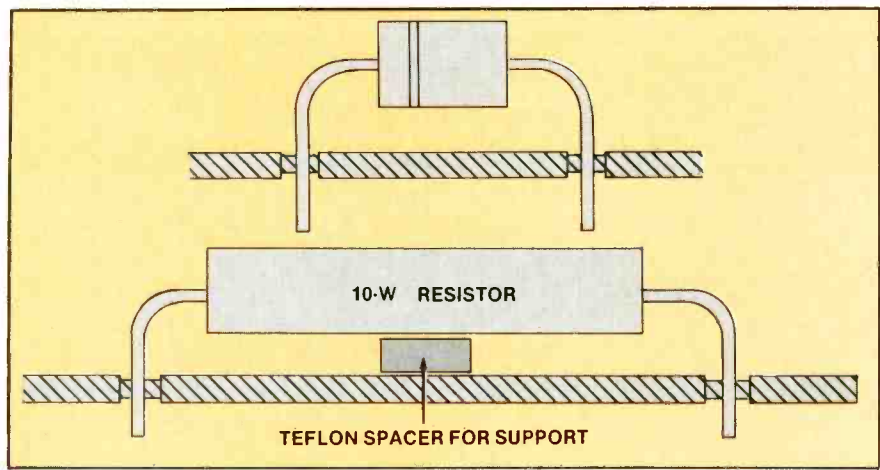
Rectifier diodes and high-power resistors should be mounted far enough above the circuit board so that the heat they generate does not damage the board. Large components may have to be supported with a heat-resistant spacer, as shown, lower right.
